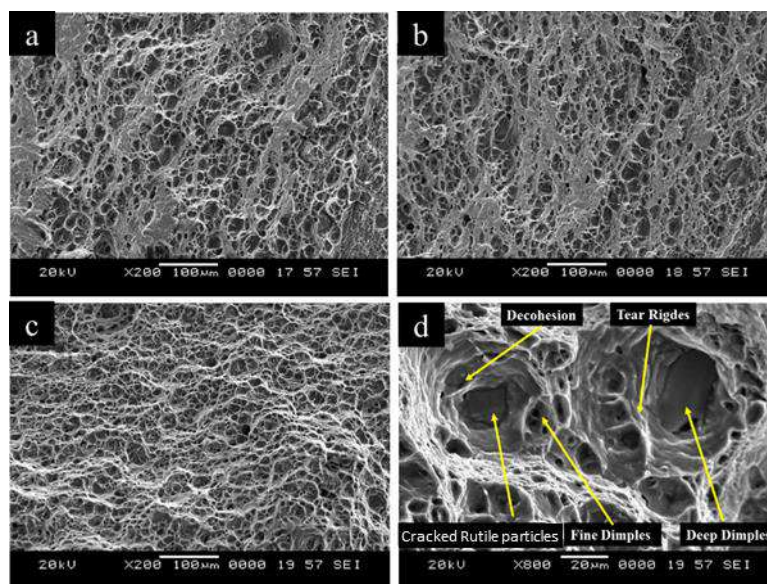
SEM image of a fractured surface of AA6061-3 (wt%) Rutile composite joints friction stir welded using SQ tool (along the weld direction) at a constant rotational speed of 1000rpm and a) welding speed of 60 mm/min, b) welding speed of 75 mm/min, c) welding speed of 90 mm/min, and d) higher magnification image showing the dimples and Rutile particles.
